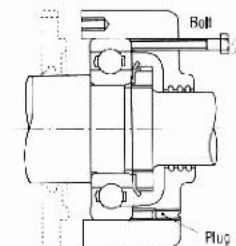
Removal of Outer Ring with Dismounting Bolts
